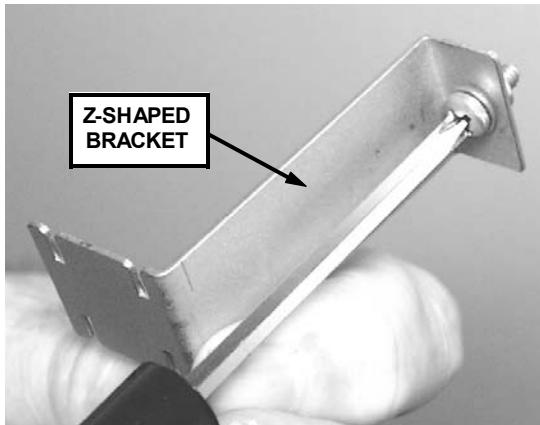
Helpful Hint. Hold screw in place with screwdriver before inserting screw.
